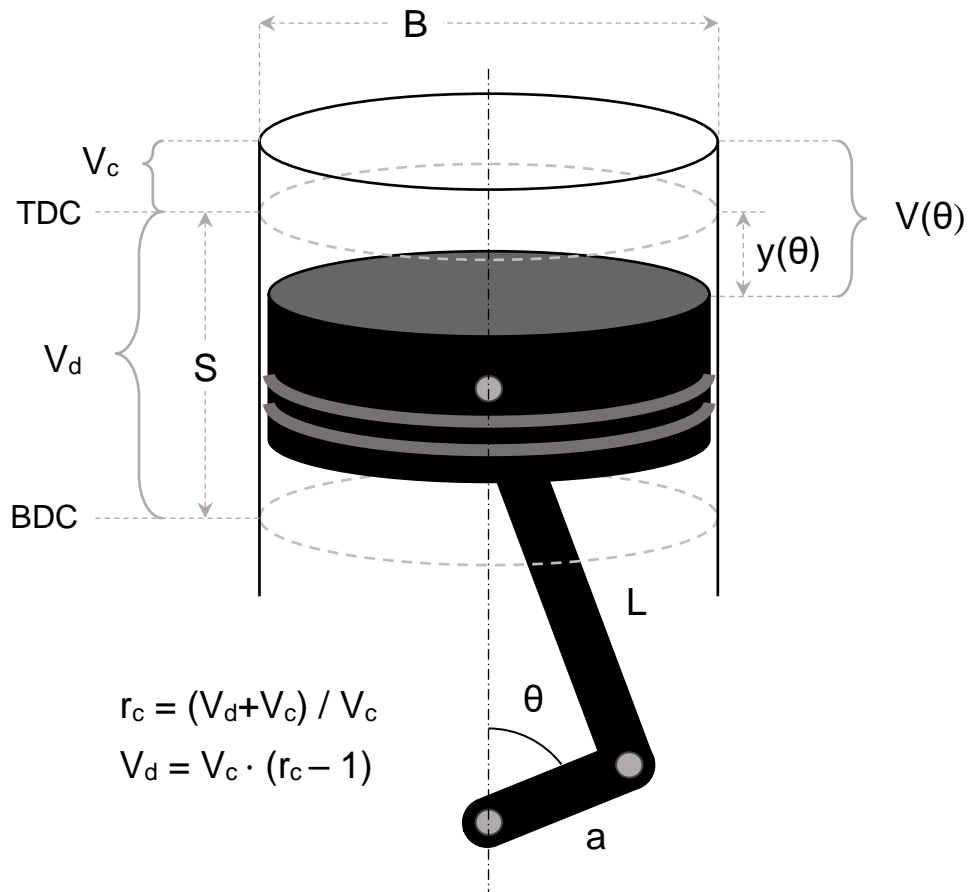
Schematic of an internal combustion engine piston-cylinder mechanism with relevant dimensions, stations, and relationships illustrated.
